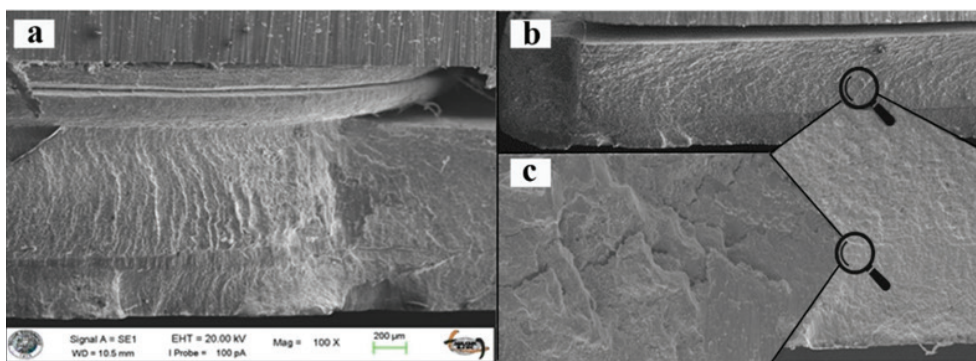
SEM images of damaged surfaces of the 8-kA sample; (a) SEM image of the weld zone on the damaged surface; (b) SEM image of the area where the rupture occurred on the damaged surface; (c) Image of intergranular fractures on the fracture surface of the sample damaged at low amplitude.
